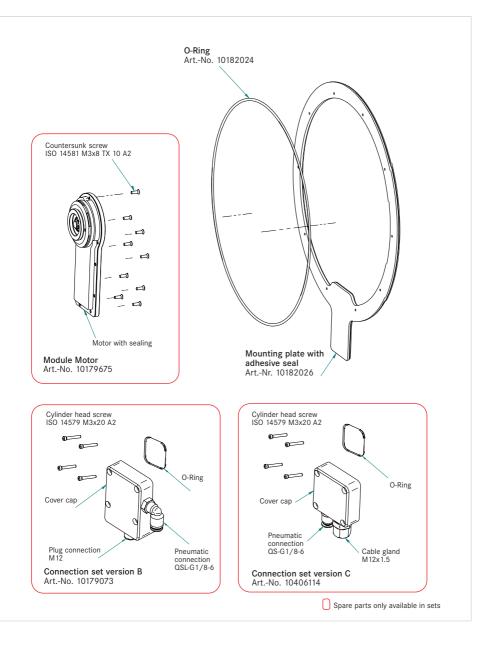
SPINVISTA NEO - exploded drawing with article numbers
